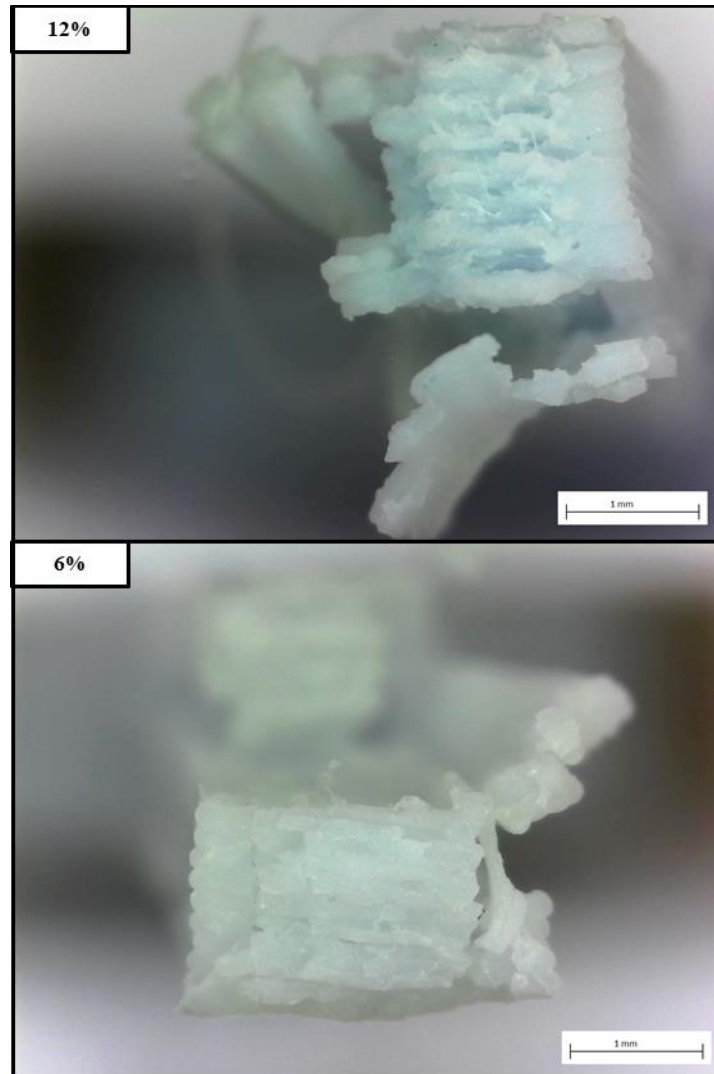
Representative fracture surfaces of tensile specimen with composition 12%. One specimen with 6% composition failed during testing.
